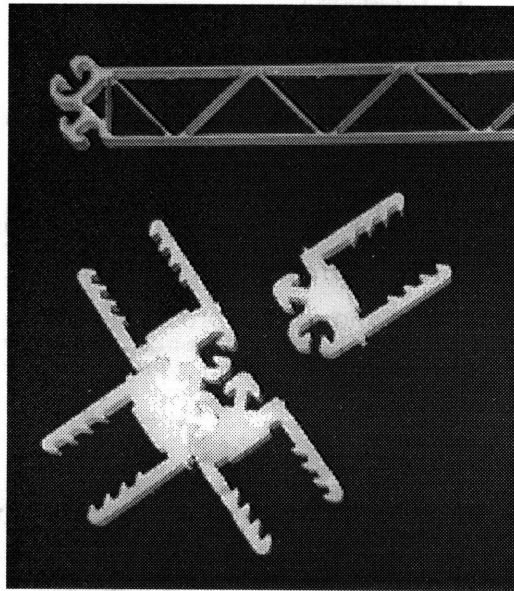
Prototyping the barb joints implemented the waterjet cutter to produce these 0.25" inch deep samples.
